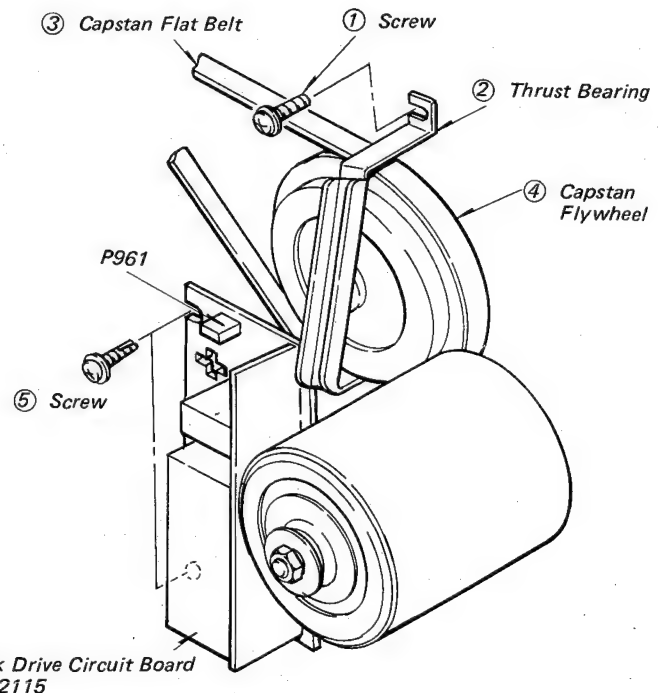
Disk Drive Board PW-2115 and Capstan Flywheel.
